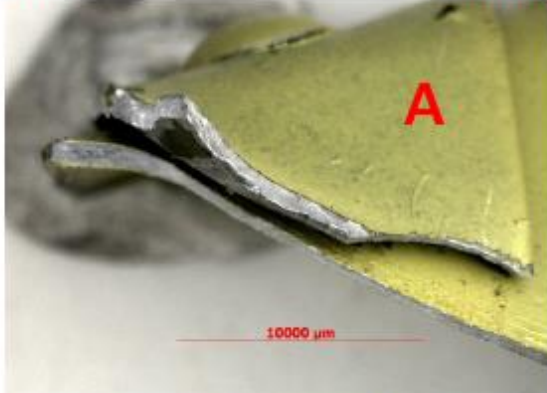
Sectioned fracture locations, inboard section (Stereo)
